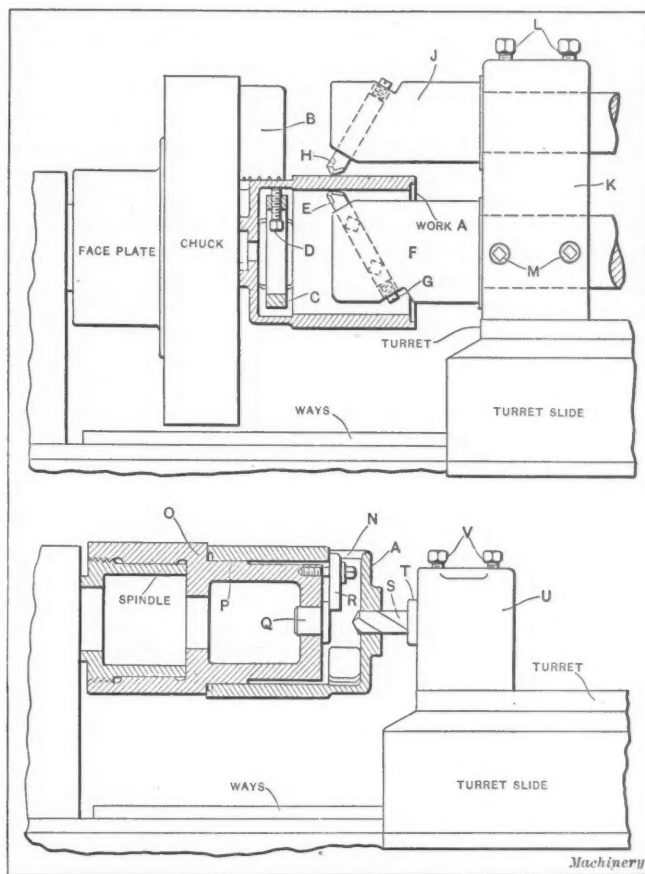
Steel Casting of Fragile Construction machined on Turntable Lathe
